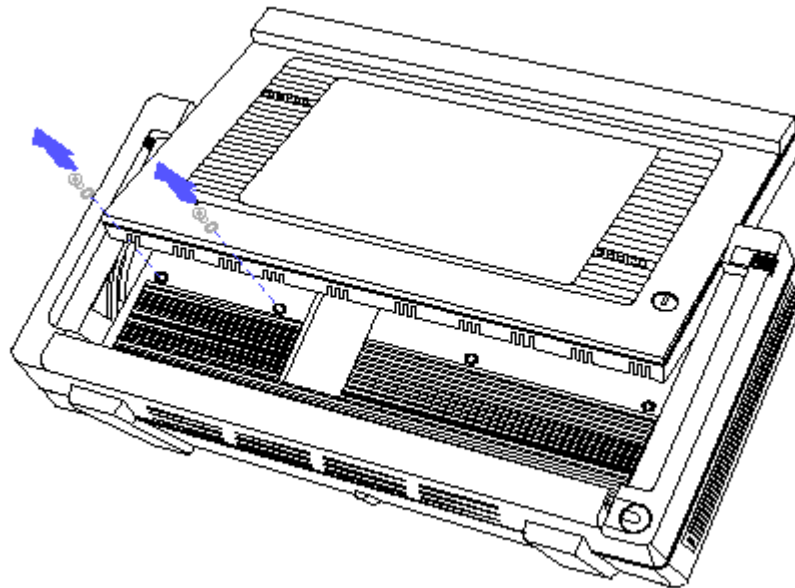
Removing the Bottom Two Screws and Washers from the Power Supply
